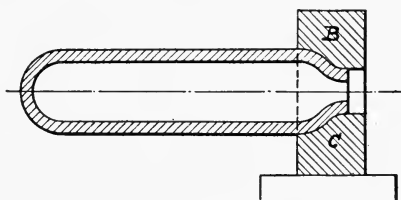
Reducing the Opening in a Hot-Drawn Tube
